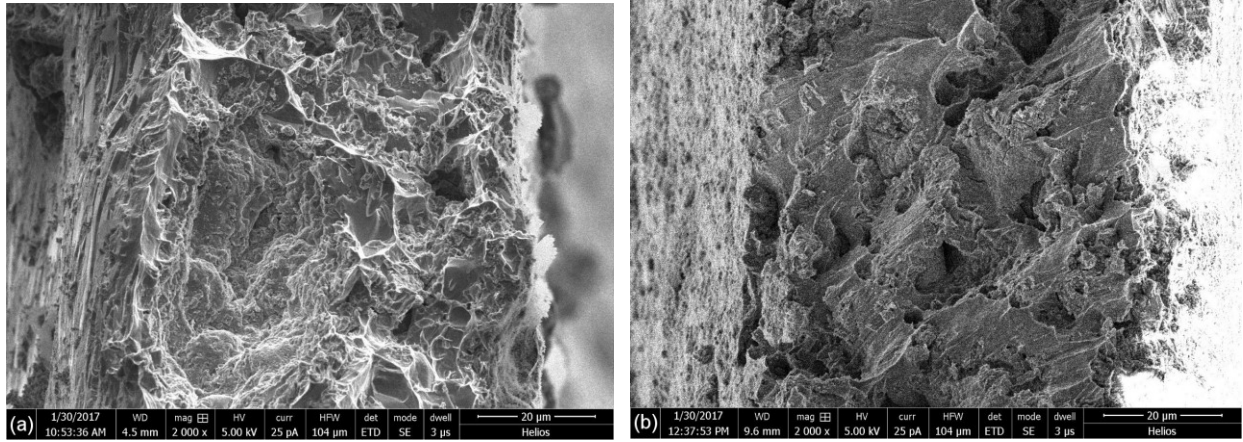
Fracture surfaces in (a) mechanically fractured and (b) laser formed metal foam specimens. The fracture surface in (a) consists of a mix of dimples and clean surfaces with sharp edges, indicating a mix of ductile and brittle fracture. The material on the surface of (b), on the other hand, appears to have been stretched severely, indicating a more ductile fracture.
